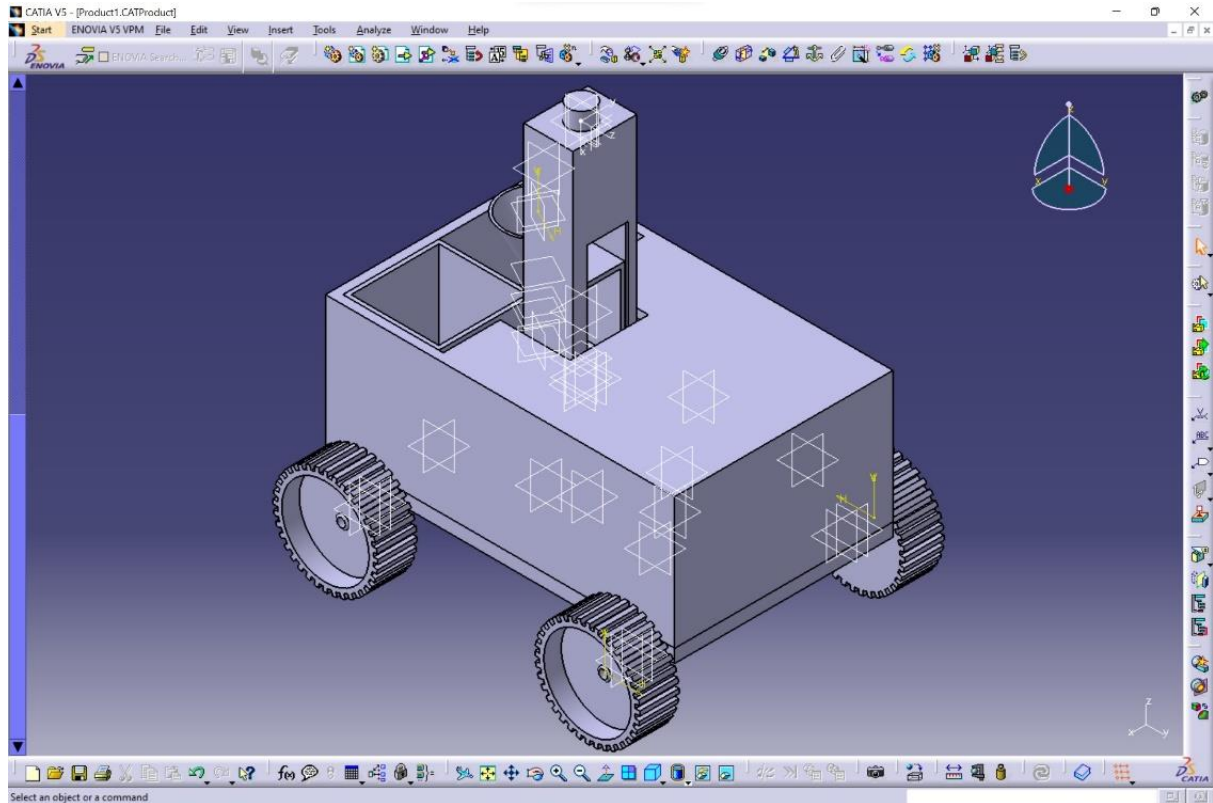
Assembly of Seed Sowing Machine with Outerpart
